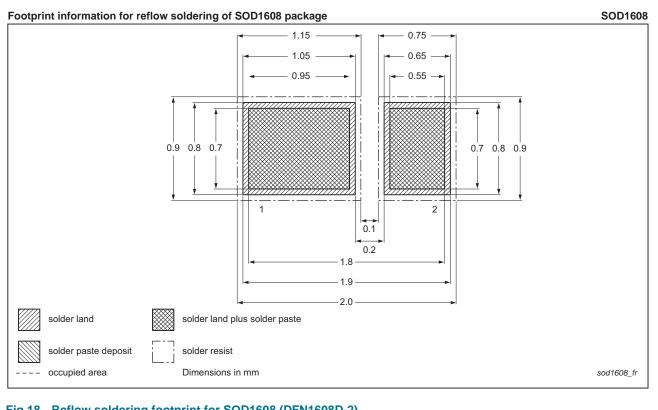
Reflow soldering footprint for SOD1608 (DFN1608D-2)
